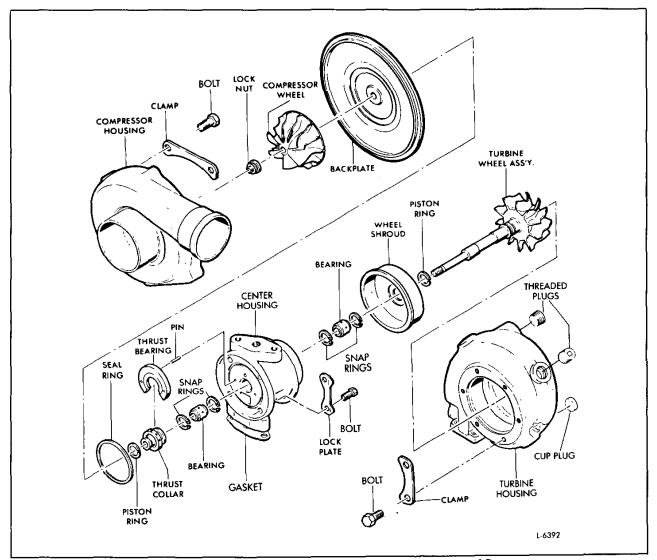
Model TW4103 Turbocharger and Relative Location of Parts
